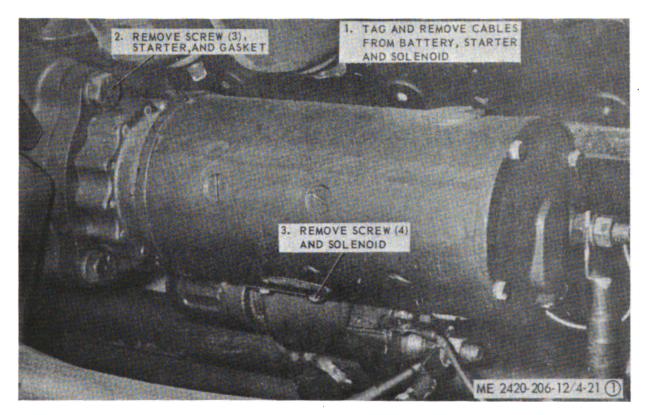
Starter and solenoid, removal, disassembly, reassembly, and installation (sheet 1 of 2).
